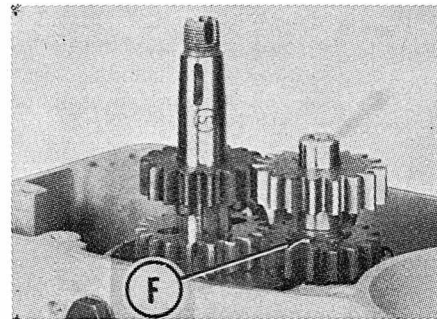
In third gear, pawls should be 0.02 inch above face of gears as shown. Refer to text.
